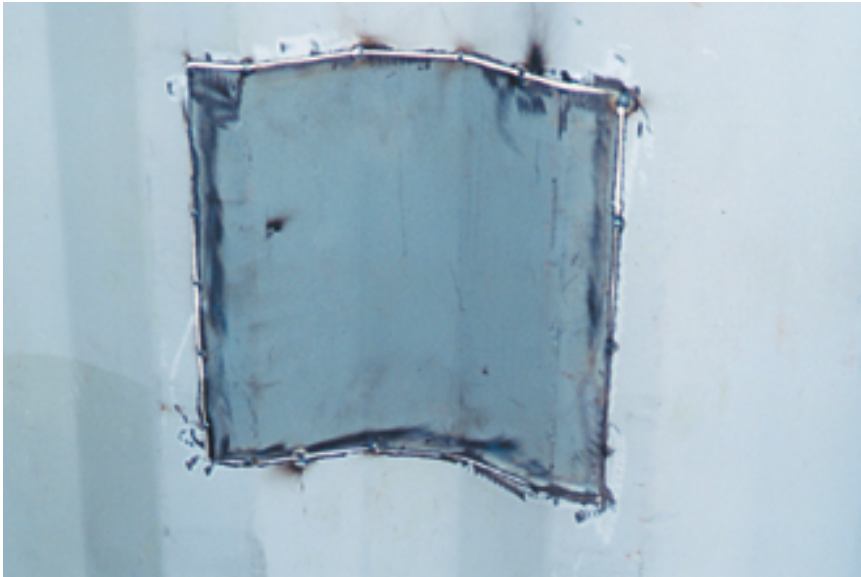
(to left) / Full penetration of continuous panel insert weld to interior side
